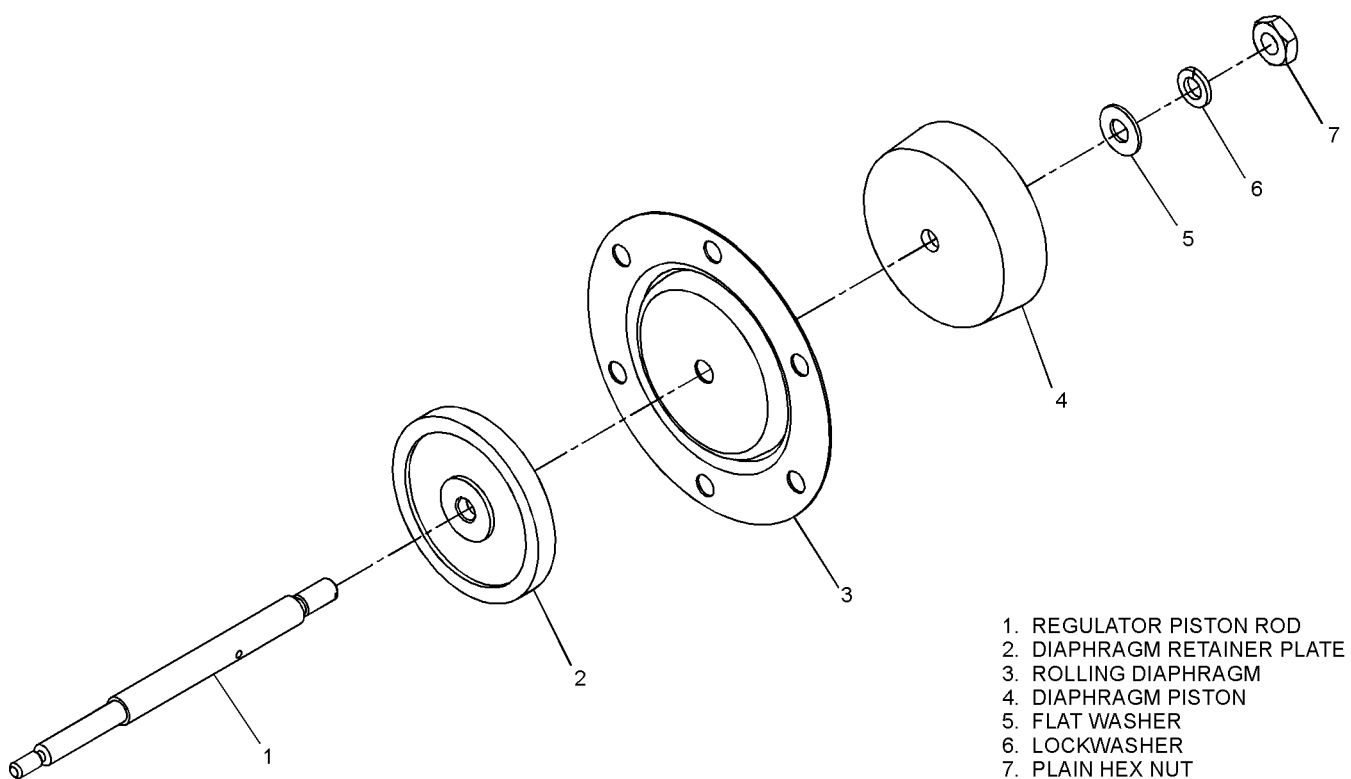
Regulator Diaphragm Assembly, P/N 1647152-1 Removal/Assembly
